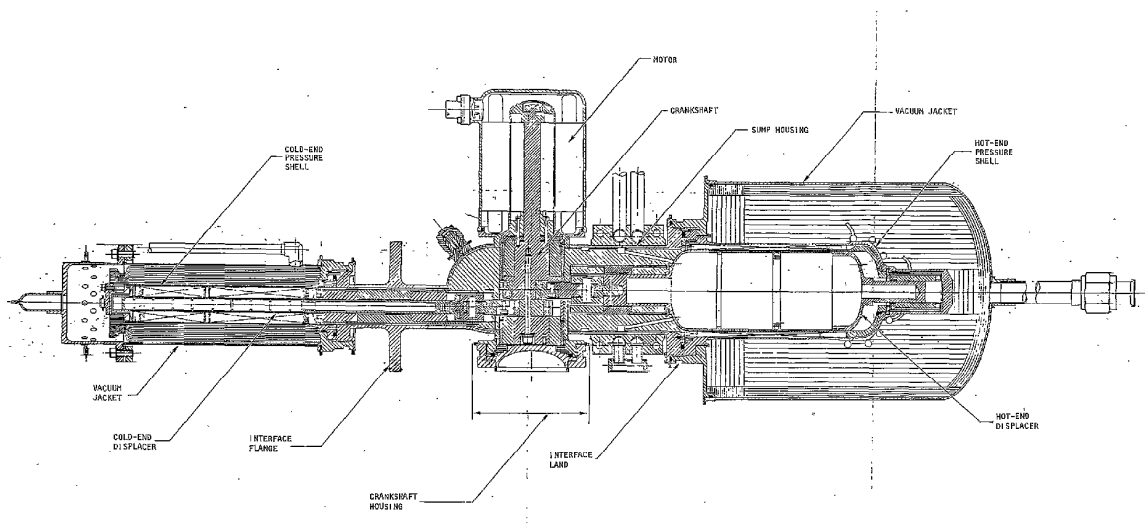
Engineering drawing of the AiResearch fractional watt Vuilleumier cryogenic refrigerator [5].
